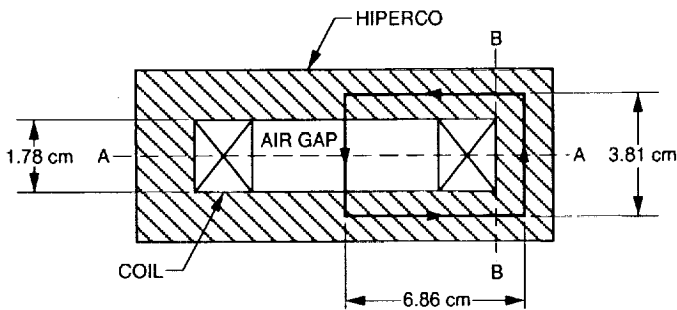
The transverse dimensions of the magnet assembly, including the contour used for the Ampere's law integration.
